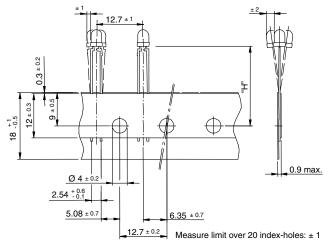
Tape Dimensions Ø 3 mm Devices
